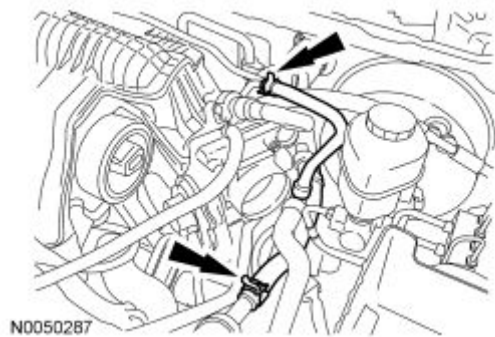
Heater Hose & Positive Crankcase Ventilation (PCV) Coolant Hose
